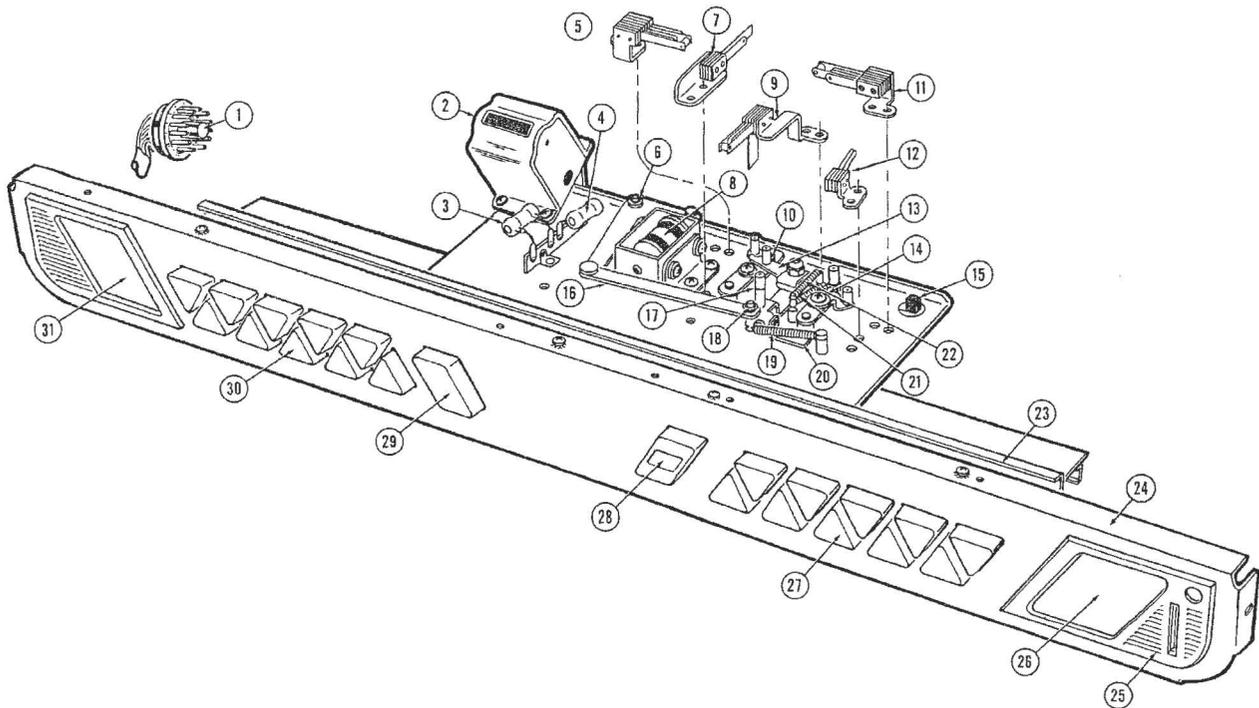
SELECTOR SWITCH ASSEMBLY, 2410-2410S
